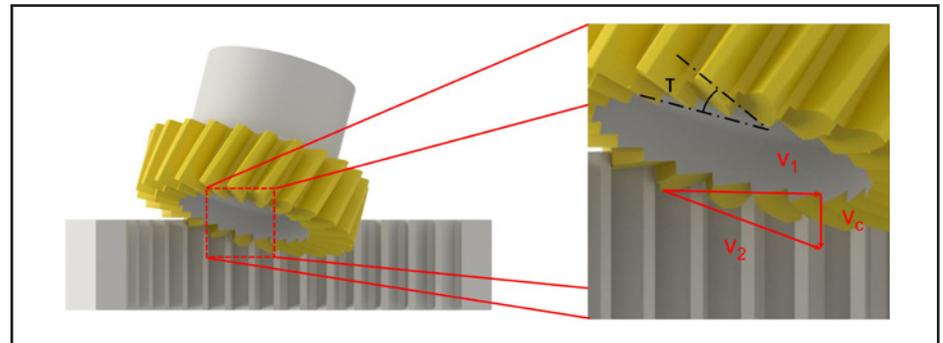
Cutting velocities during gear skiving (v_1 rotation of the work gear, v_2 rotation of the tool, v_c resulting cutting speed).
